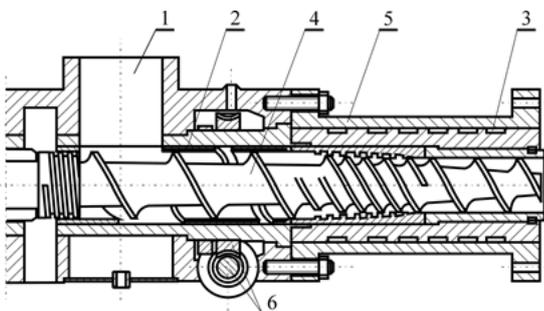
Longitudinal section diagram of an adjustable grooved feed section of an extruder: 1 – feed opening, 2 – sleeve with a spiral undercut, 3 – cooling channels, 4 – screw, 5 – barrel, 6 – worm gear [1]
